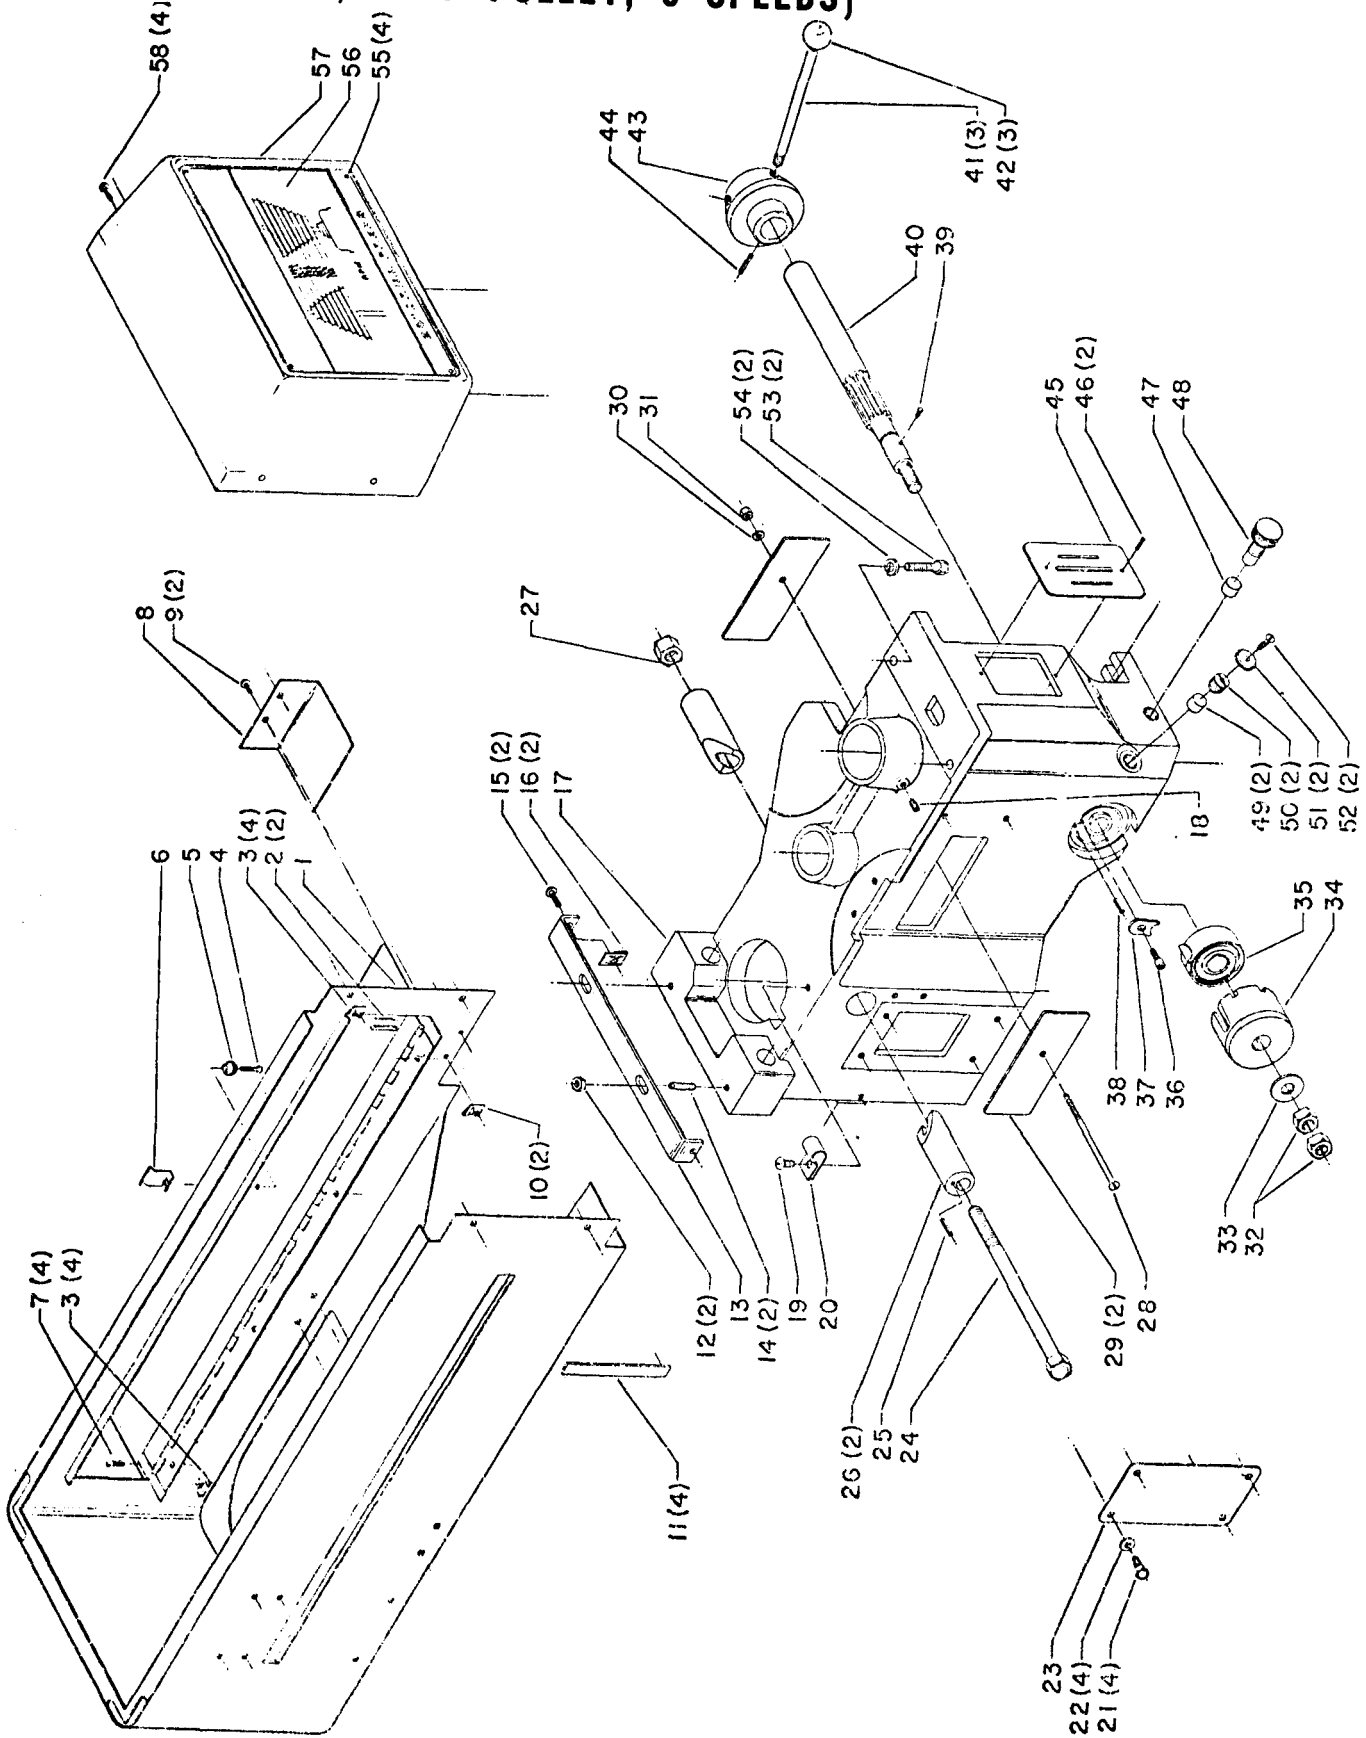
Series 2000 Drilling Machines - Direct Drive
